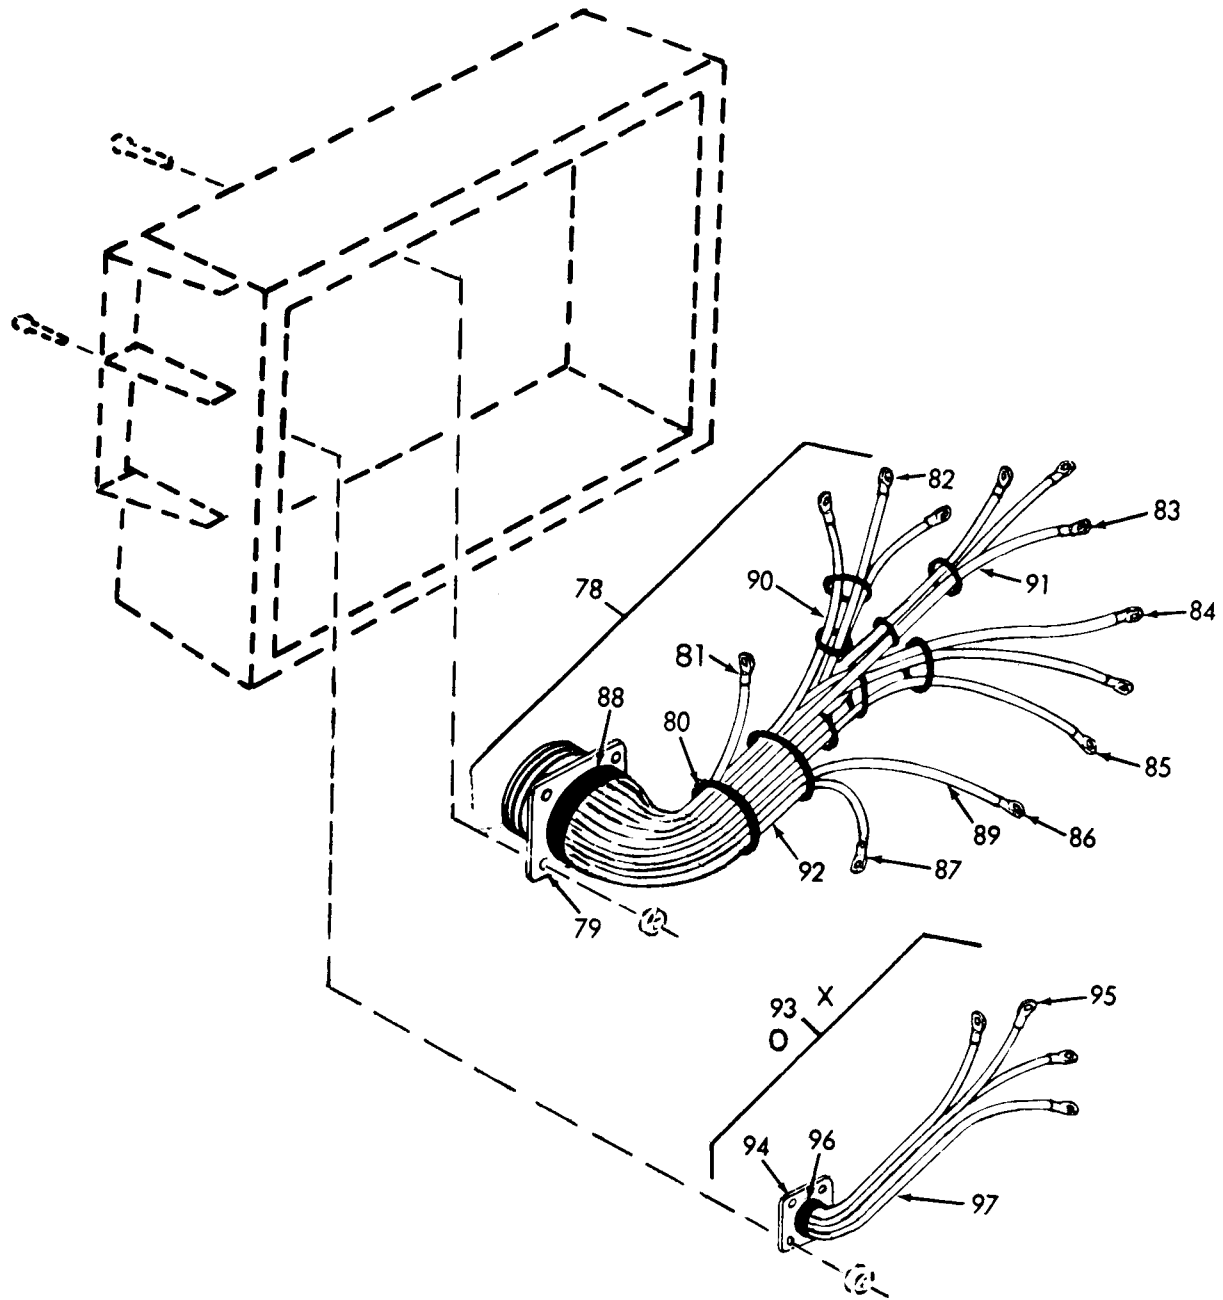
Junction Box Assembly (Sheet 3 of 3)
